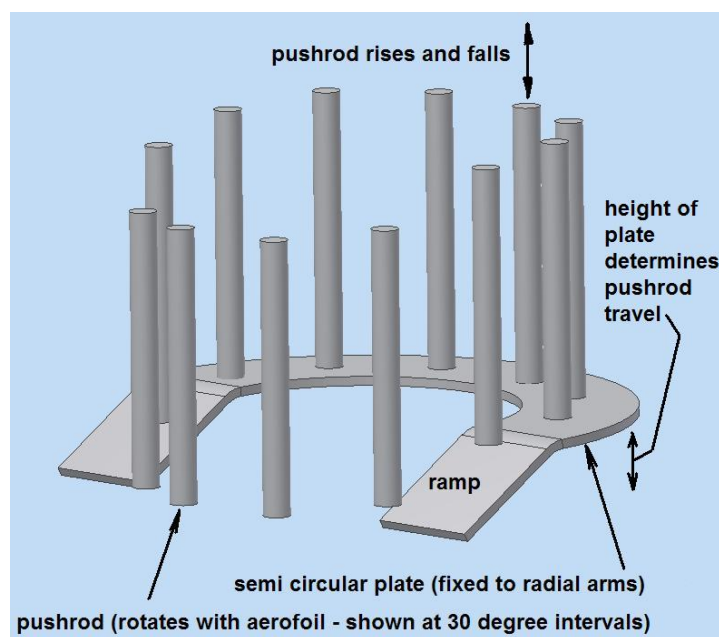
Initial mechanical tail control setup – pushrod running on plate
